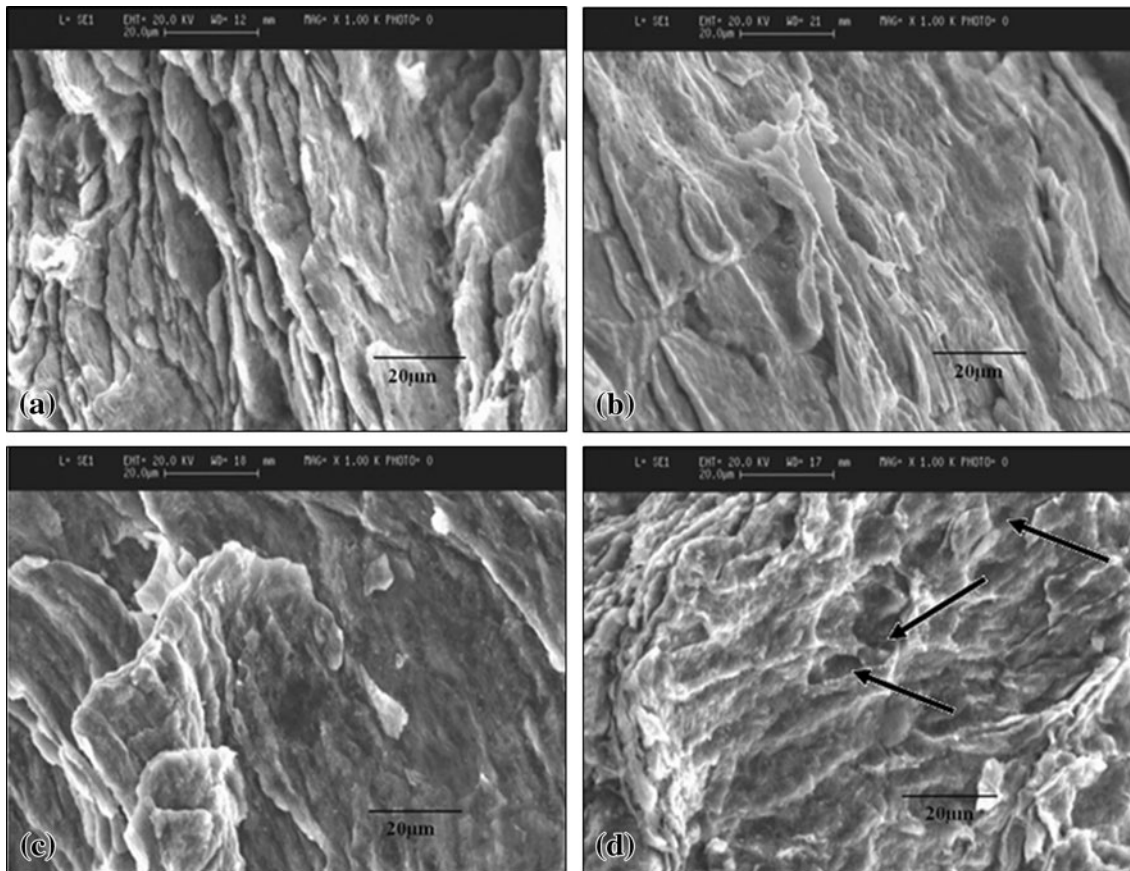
The fracture surface of the Al-5 vol.% Al_2O_3 composite after (a) first pass, (b) second pass, (c) third pass, and (d) extrusion
